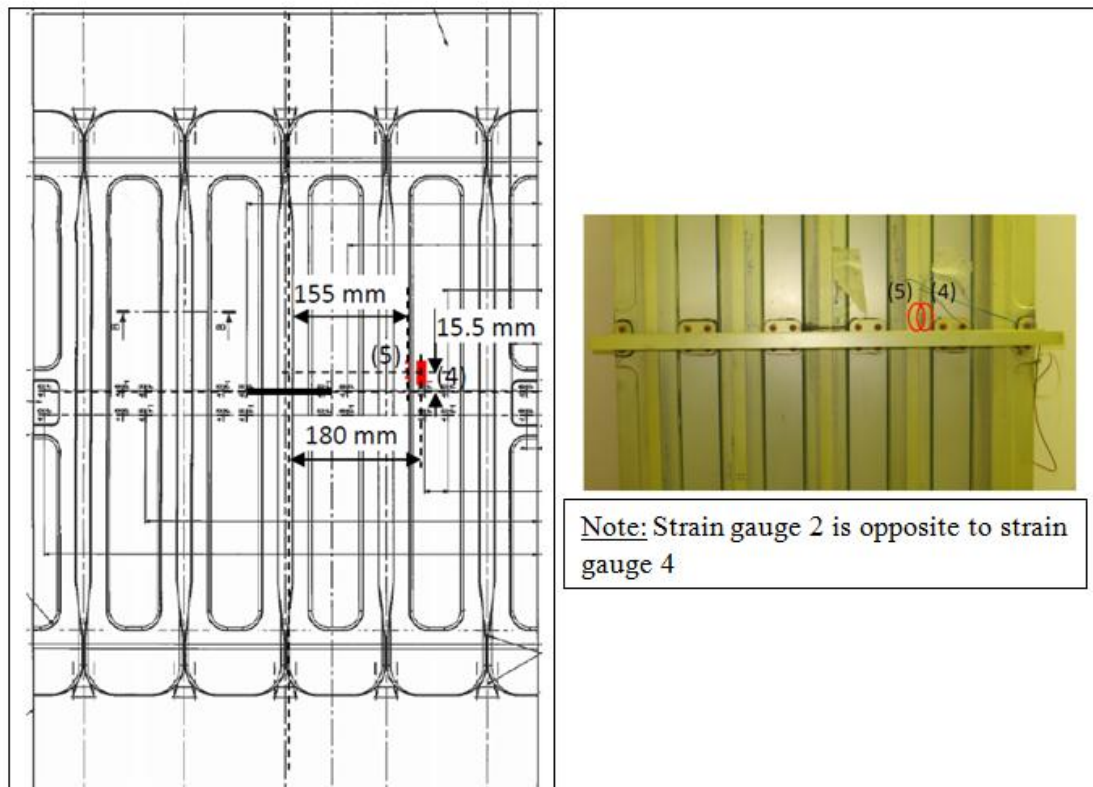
Panel 5 strain gauge location – Back view (strain gauge 4, 5)
